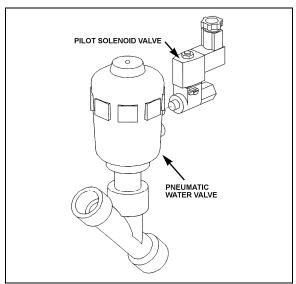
DRIVER'S HOT WATER PNEUMATIC VALVE ASSEMBLY
